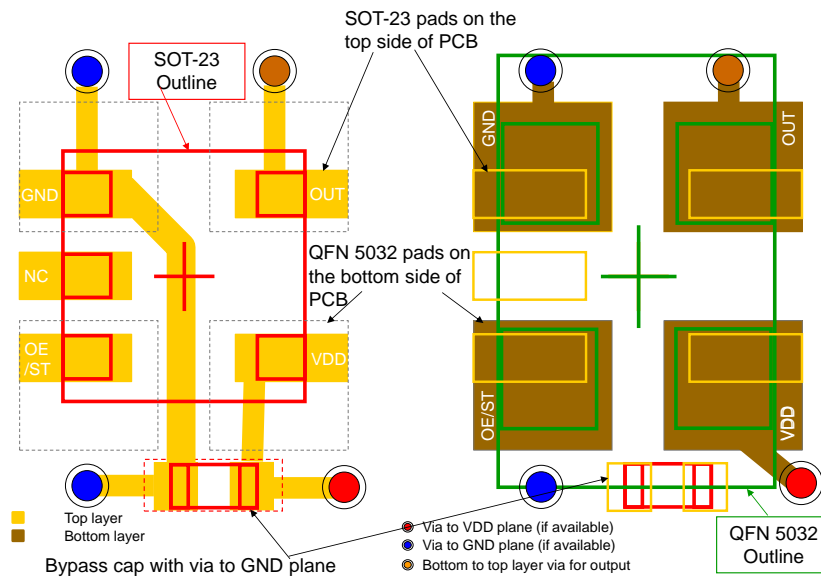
QFN 5032 and SOT23-5 stacked design layout example showing placement of both QFN 5032 and SOT23-5 devices
